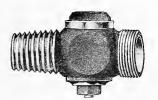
THREADED FOR IRON PIPE ON SHORT END. COARSE THREAD ON LONG END, FOR WOOD MAIN.
